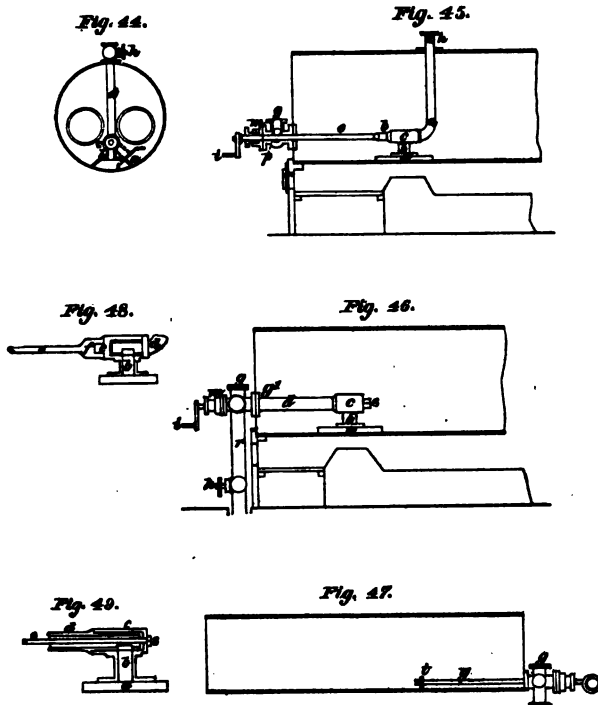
indicates a cross-sectional view of a steam boiler with Jones' oscillating scraping-deflector, and Fig. 45 is a longitudinal section of same, showing a front connection for operating the deflector, and a socket and ball valve so arranged as to force the mud and scale up and out of the top of the boiler. Fig. 46 is a longitudinal sectional view of a boiler with Jones' oscillating scraping-deflector, with socket and ball valve so arranged as to blow off the mud and scale through the front head of the boiler. Fig. 47 is a view of same with one scraper and socket and ball valve. Fig. 48 is a view showing the internal construction of the sleeve and scraper shown in Fig. 45. Fig. 49 is a like view of the same parts as shown in Fig. 46.
